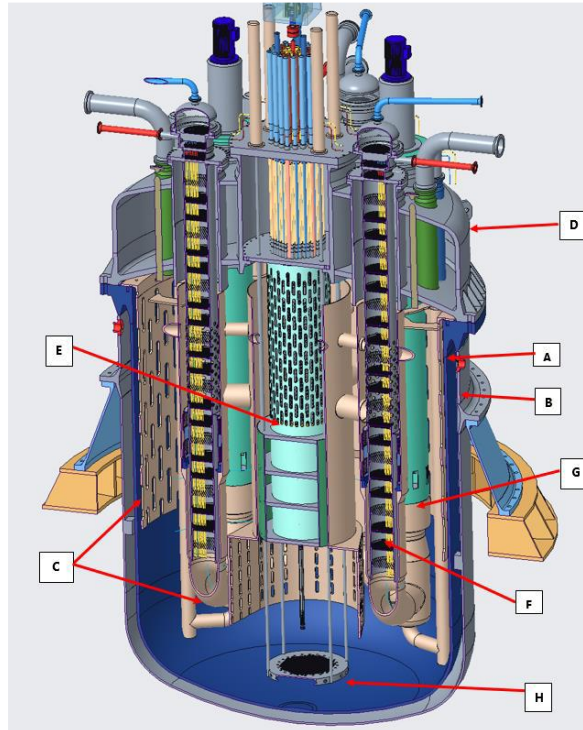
MYRRHA reactor assembly isometric cross-sectional view [118]
